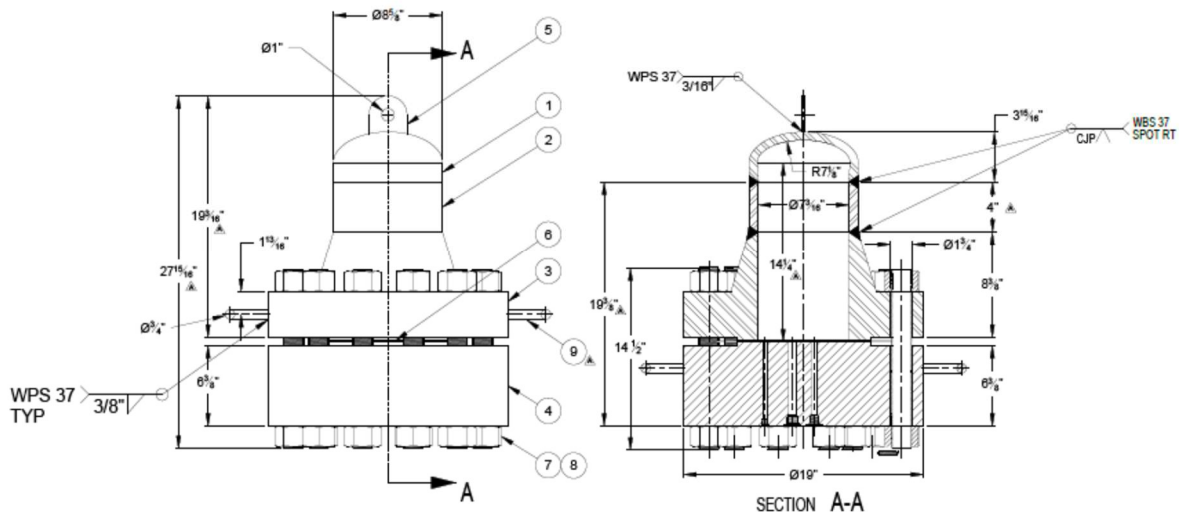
VACE Vessel Design Drawing provided by Johansing Iron Works[43]
